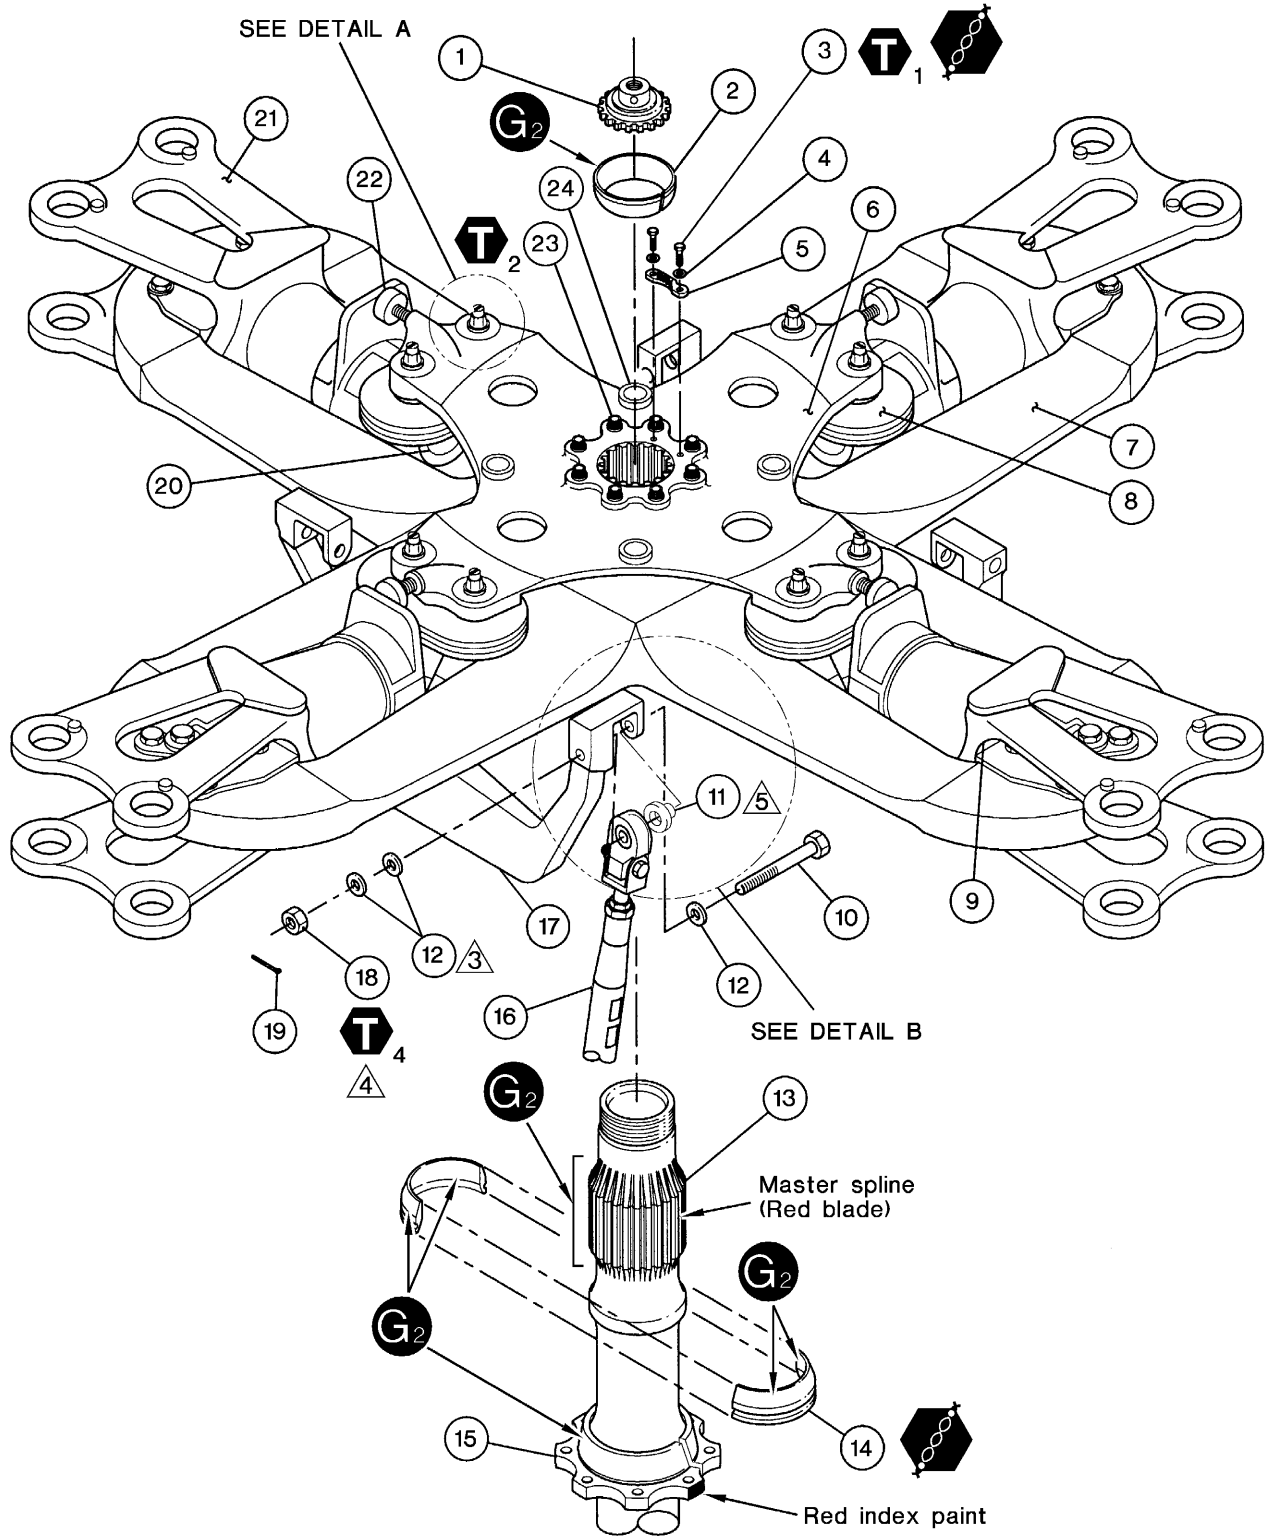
Main Rotor Hub Assembly (Sheet 1)
